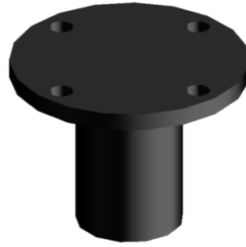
Shaft for the Lifting Mechanism of the Crane
